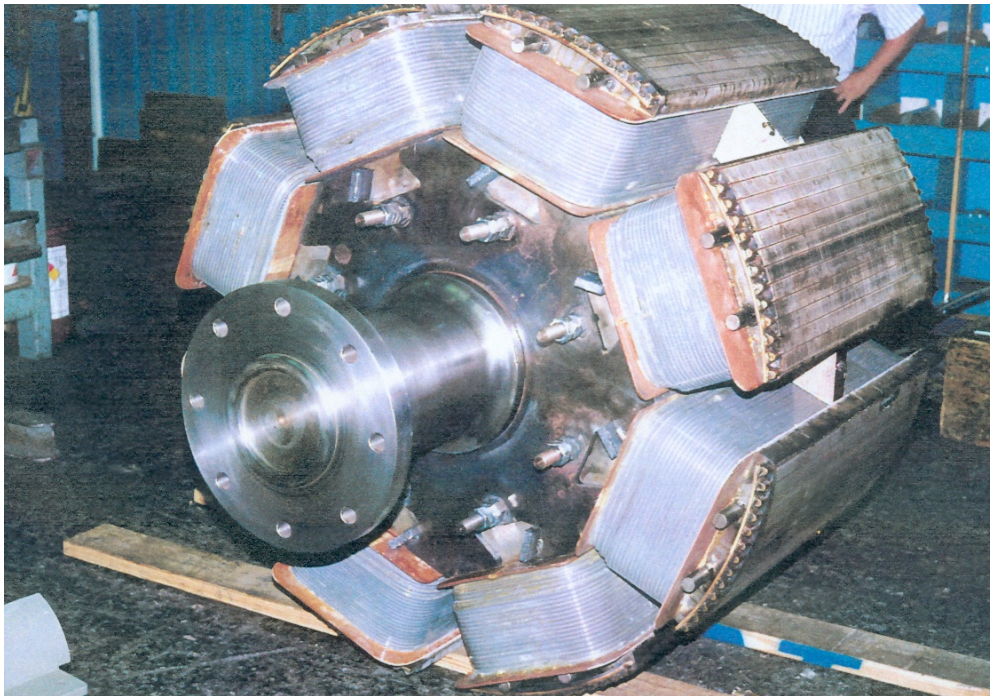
Complete Rotor Assembly (coupling end-of-shaft view)
